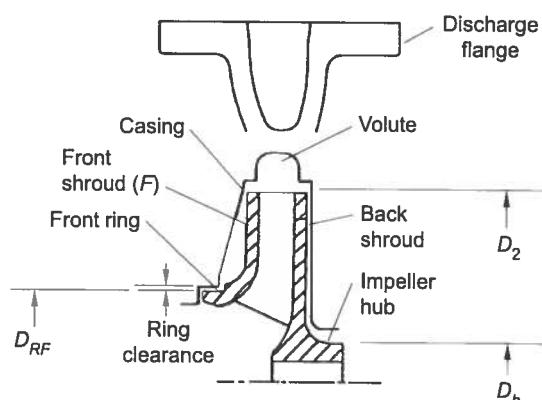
Thrust calculation example for enclosed impeller with plain back shroud
